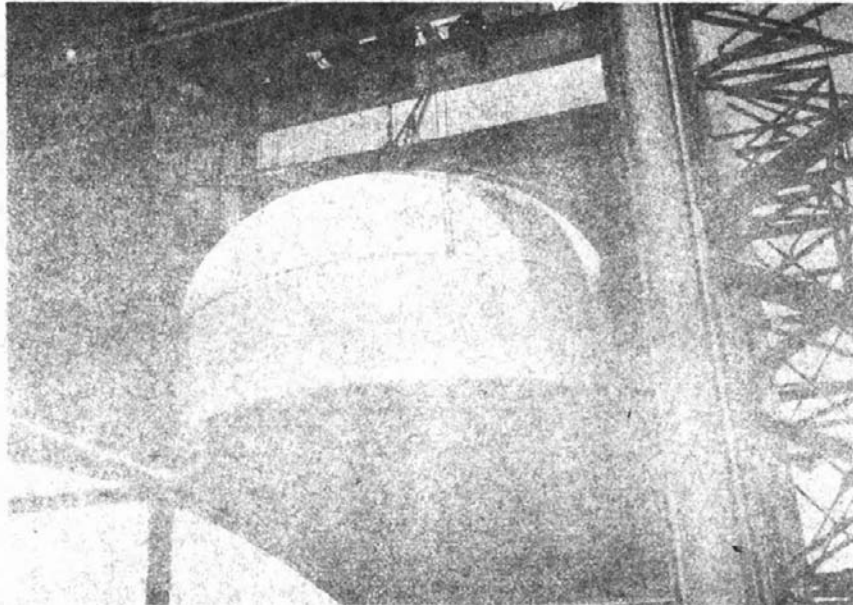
S-II-S LH₂ Bulkhead/Cylinder Assembly
